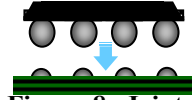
Joint formation evaluation using a BGA/CSP component on reflowed solder paste.
